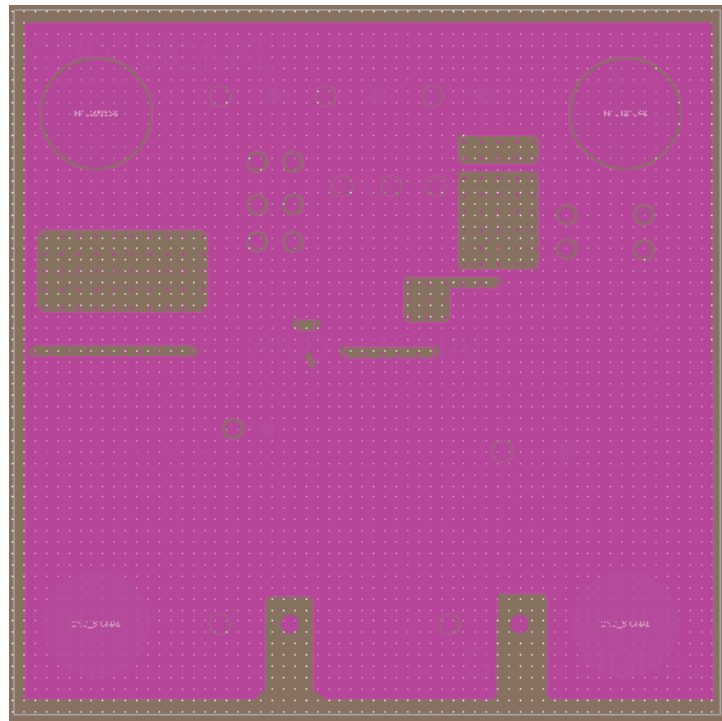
SIP3243xxEVB Board Inner 1 Layer
